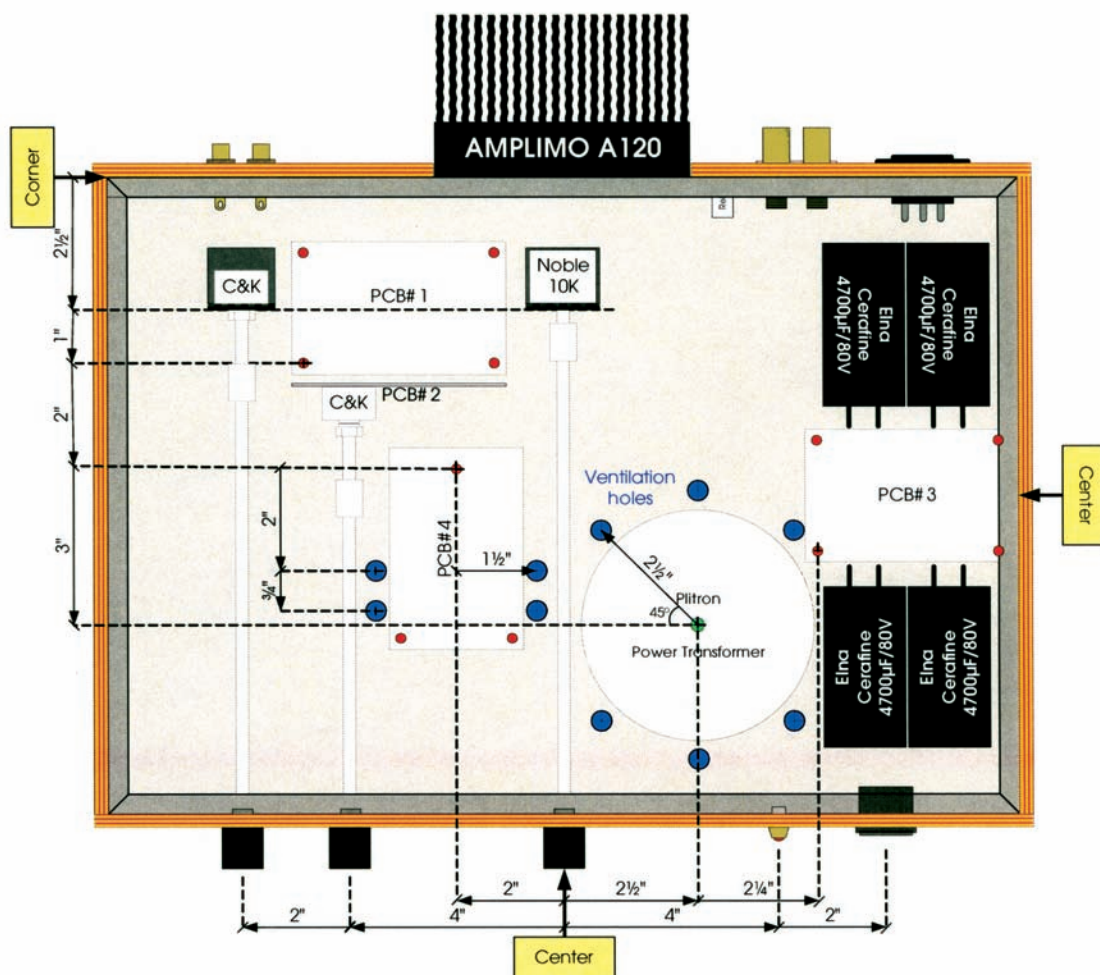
Layout of the components inside the chassis. (Red Dots: standoff holes = 3/16" drill bit. Green Dot: transformer hole = 5/16" drill bit. Blue Dots: ventilation holes = 3/8" drill bit.)
